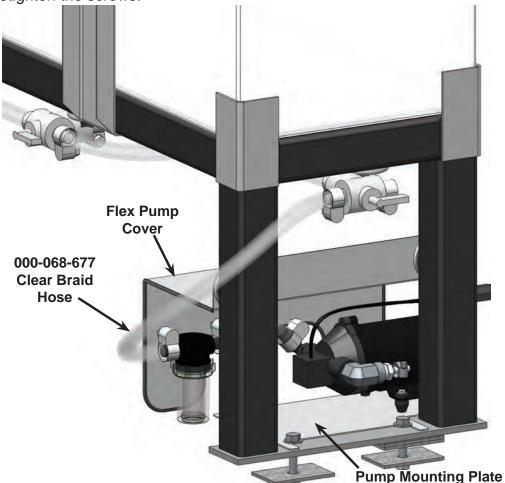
Position Passenger Side Pump with Flat End Facing Van Wall
